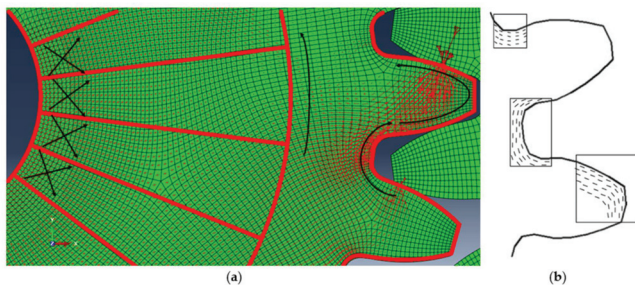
(a) Section division of spur gear for tool-path; (b) principal directions of teeth section.
